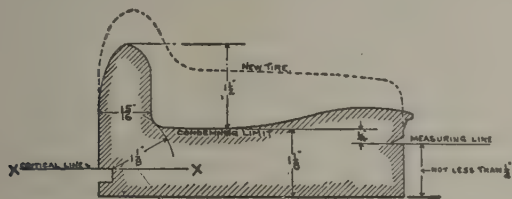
STEEL TIRE, RETAINING RING FASTENING.
